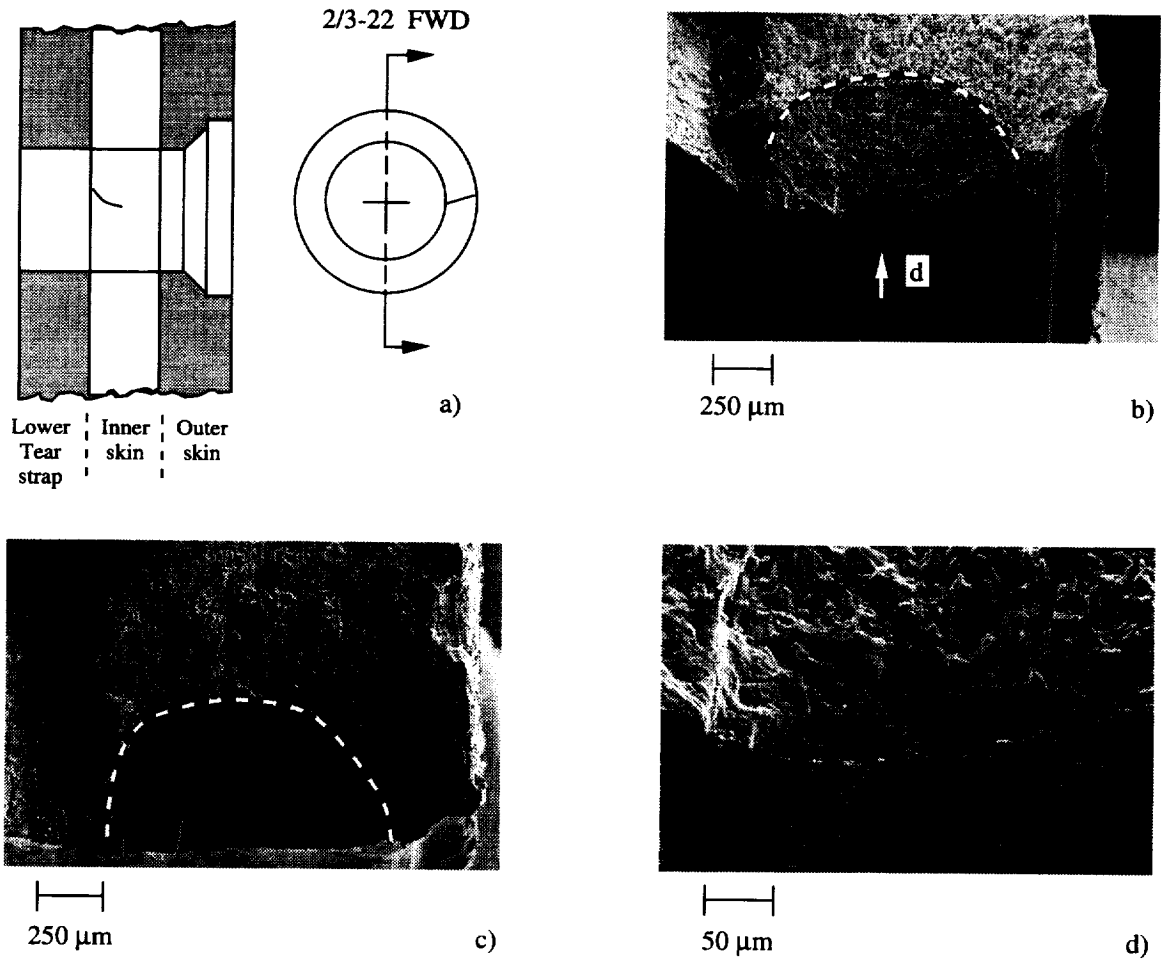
a) The schematic shows the rivet hole 2/3-22 configuration and the location of the inner skin fatigue crack oriented in the forward direction and at about the 3 o'clock position. b) The SEM micrograph shows the fatigue crack fracture surface located at the inner skin rivet hole. The specimen is oriented 45° to the SEM beam. The arrow marks the area of crack initiation on the surface of the rivet hole and the dashed line marks the fatigue crack front. The area to the left is the bonded region between the inner skin and tear strap. c) The SEM micrograph shows another view of the inner skin fatigue crack with a nearly semicircular crack marked by the dashed line. d) The SEM micrograph shows the crack initiation region "d" in Figure 8.34.b.
